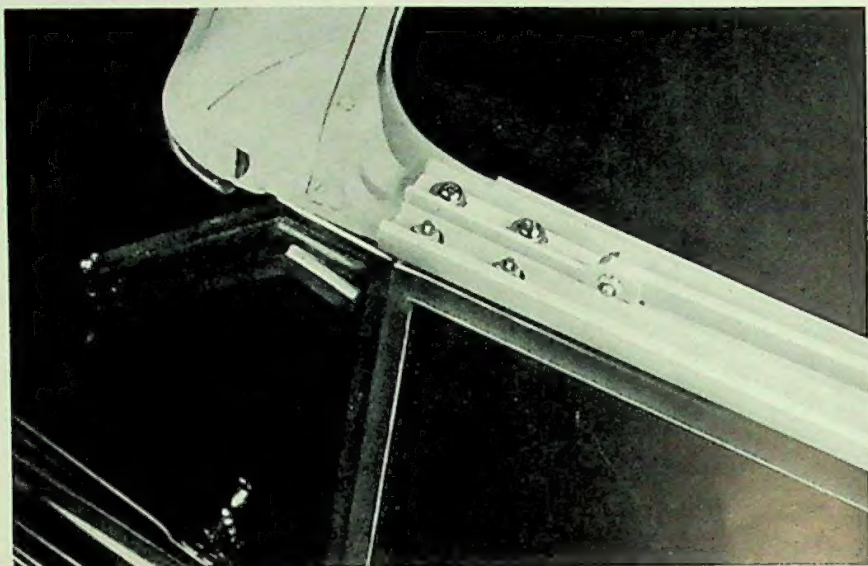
Adjust Header Alignment with Locking Dowels after Loosening Retaining Screws and Nuts.
